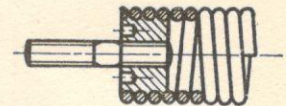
FORM L (THREADED PLUG SCREWED-IN, 2 TO 4 THREADED COILS)
